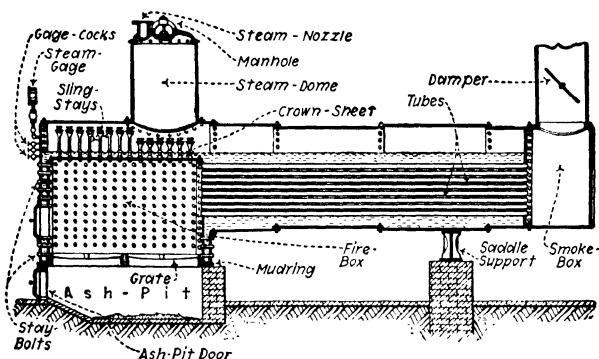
Sectional view of locomotive type of boiler as used in stationary practice.
